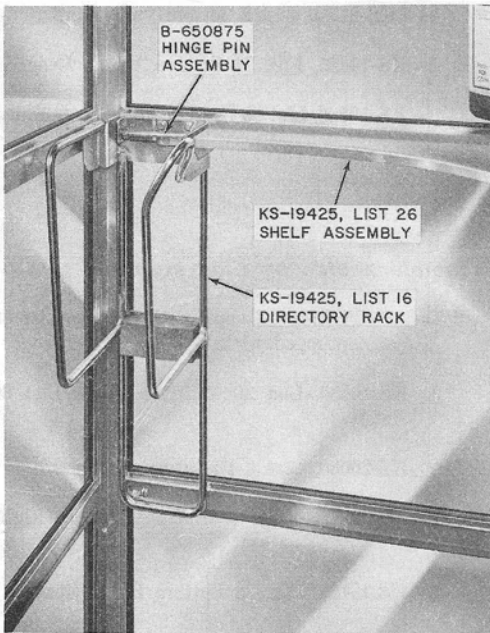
KS-19425, List 16 Directory Rack and KS-19425, List 26 Shelf Assembly
